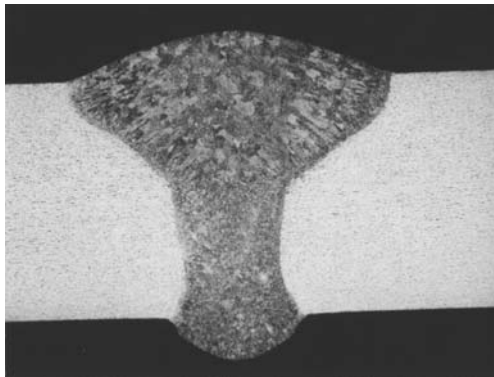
CO₂ laser beam weld of 5 mm thick aluminum alloy 2219; from [CHE 98]
